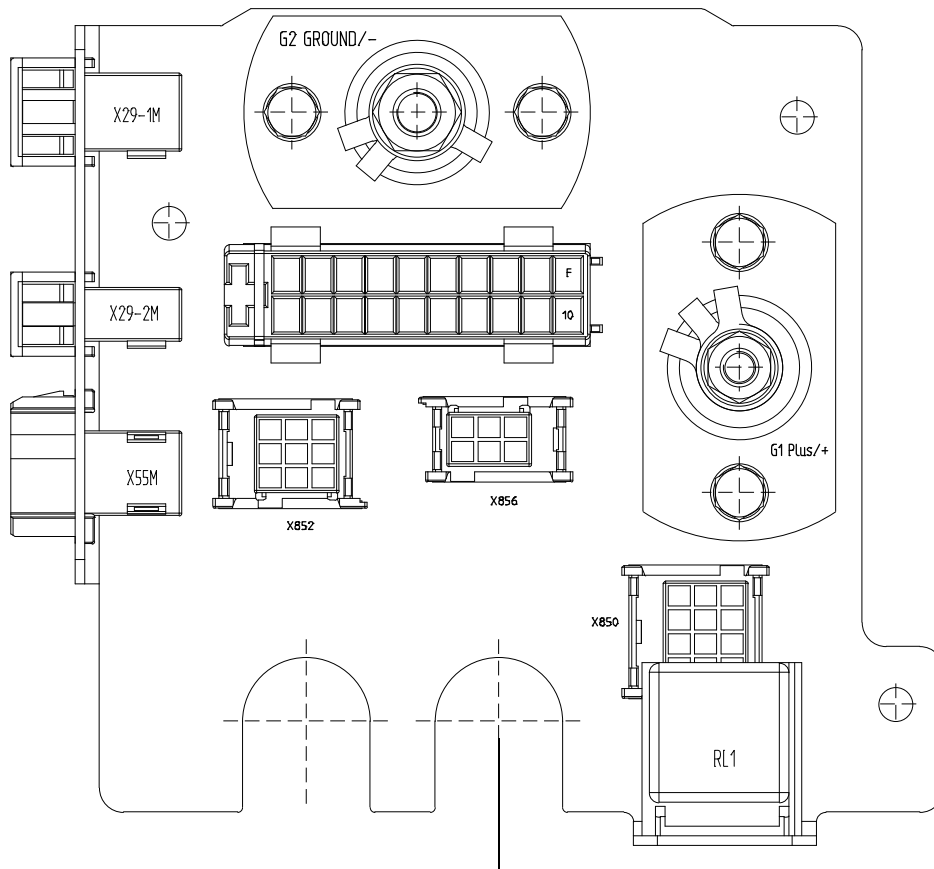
Wiring diagram for REVO Slave (Sheet 3)
